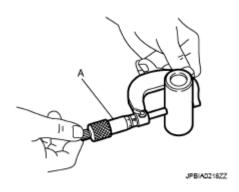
Measuring Outer Diameter Of Piston Pin Using Micrometer Courtesy of NISSAN MOTOR CO., U.S.A.
